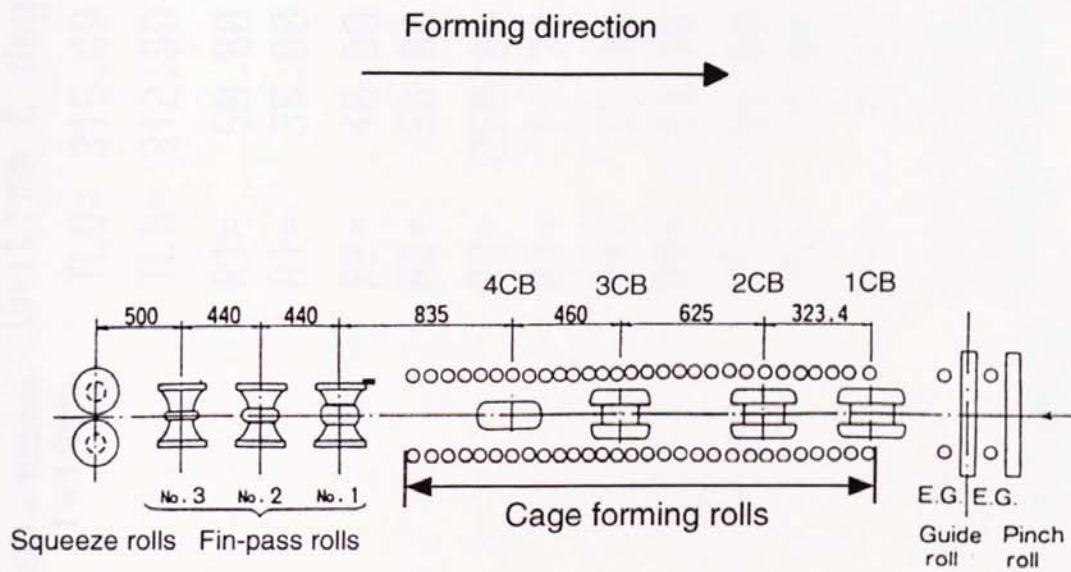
Schematic layout of 4inch full cage roll forming type model mill installed at Yamanashi University
